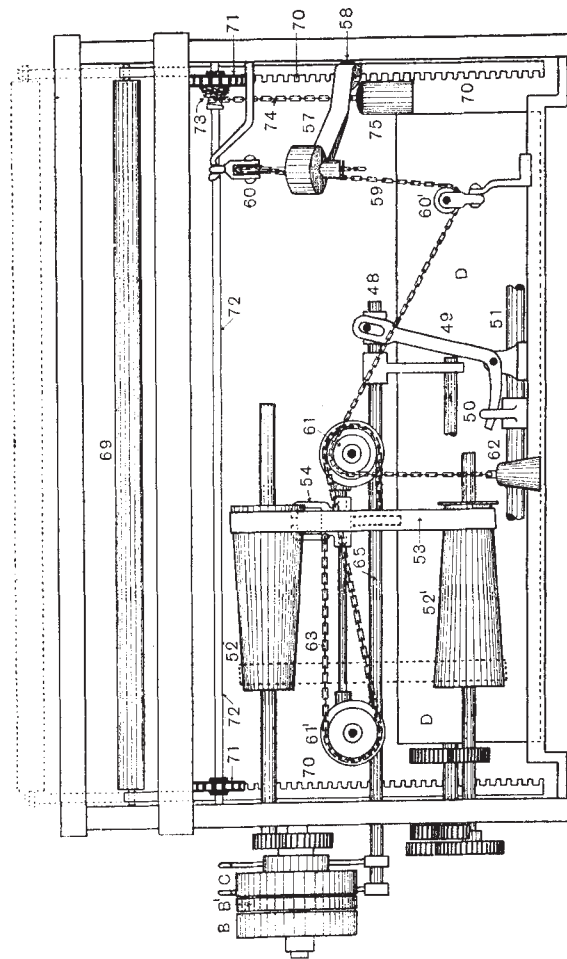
BEAM-WARPING MACHINE—AMERICAN MODIFICATION.
